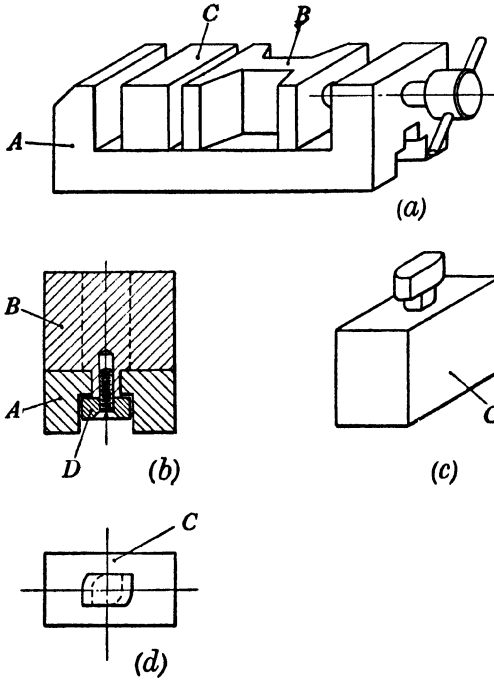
Toolmaker's clamp with extra jaw : (a) perspective, (b) cross-section through nearer jaw.
